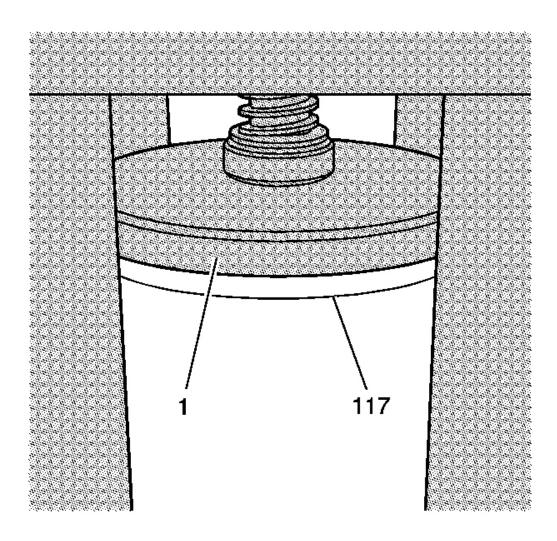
View Of Installation Arbor Courtesy of GENERAL MOTORS CORP.
